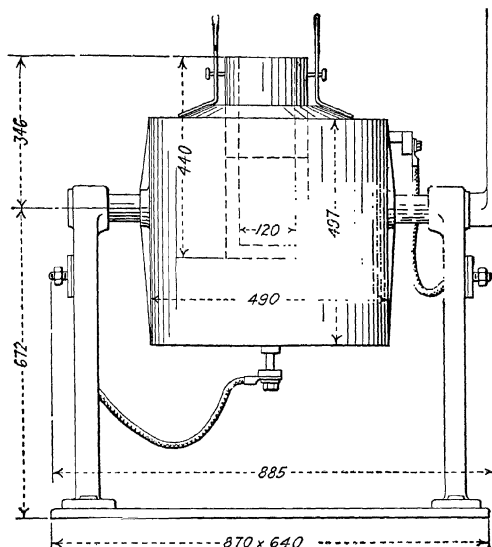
Krupp self-contained tilting furnace (dimensions in millimeters).
